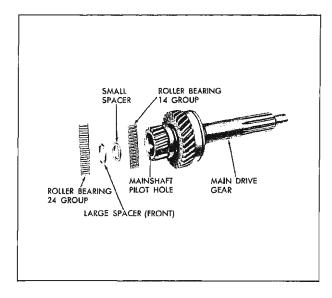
Main Drive (Clutch) Gear Assembly
